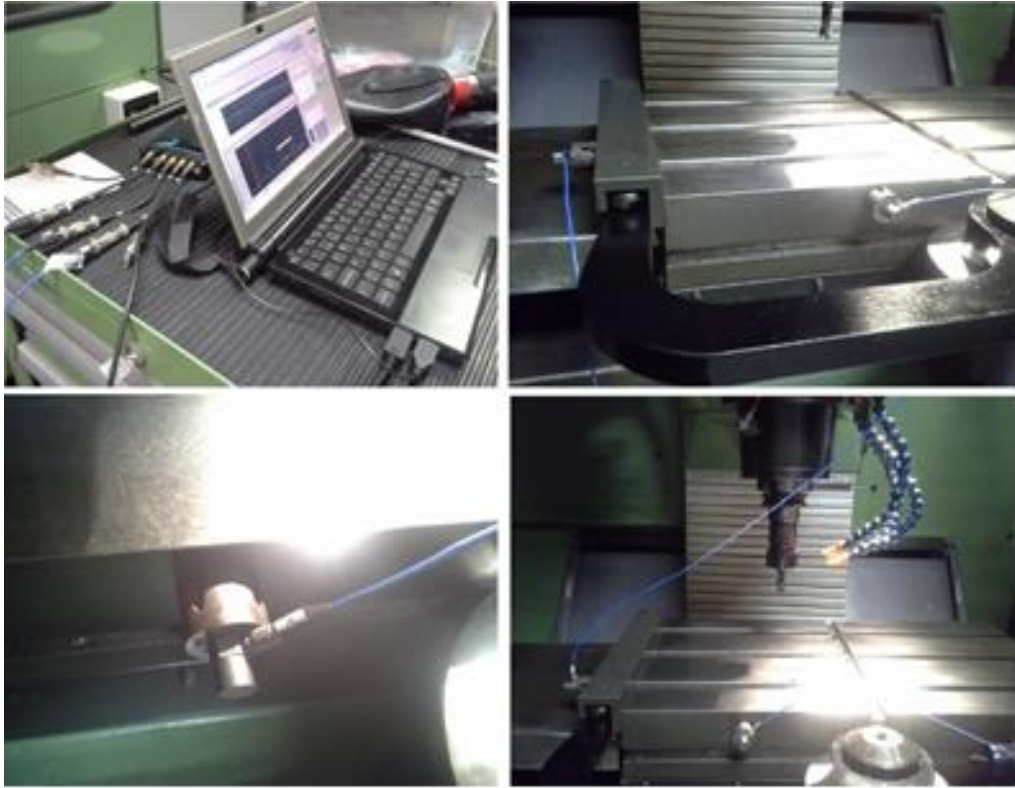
Vibration measurements on KONDISA B500 milling machine table
